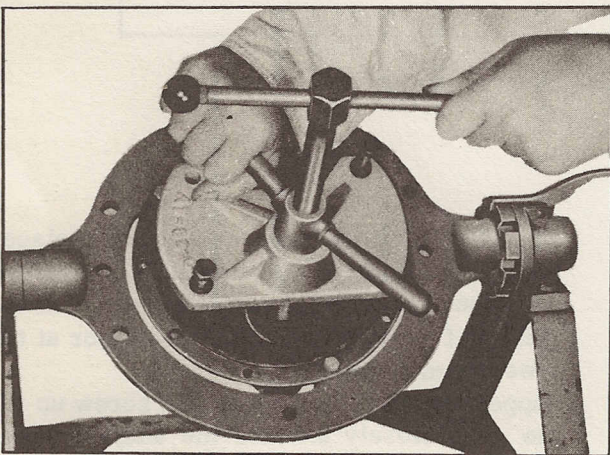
Drive Pinion Front and Rear Bearing Outer Race Replace
